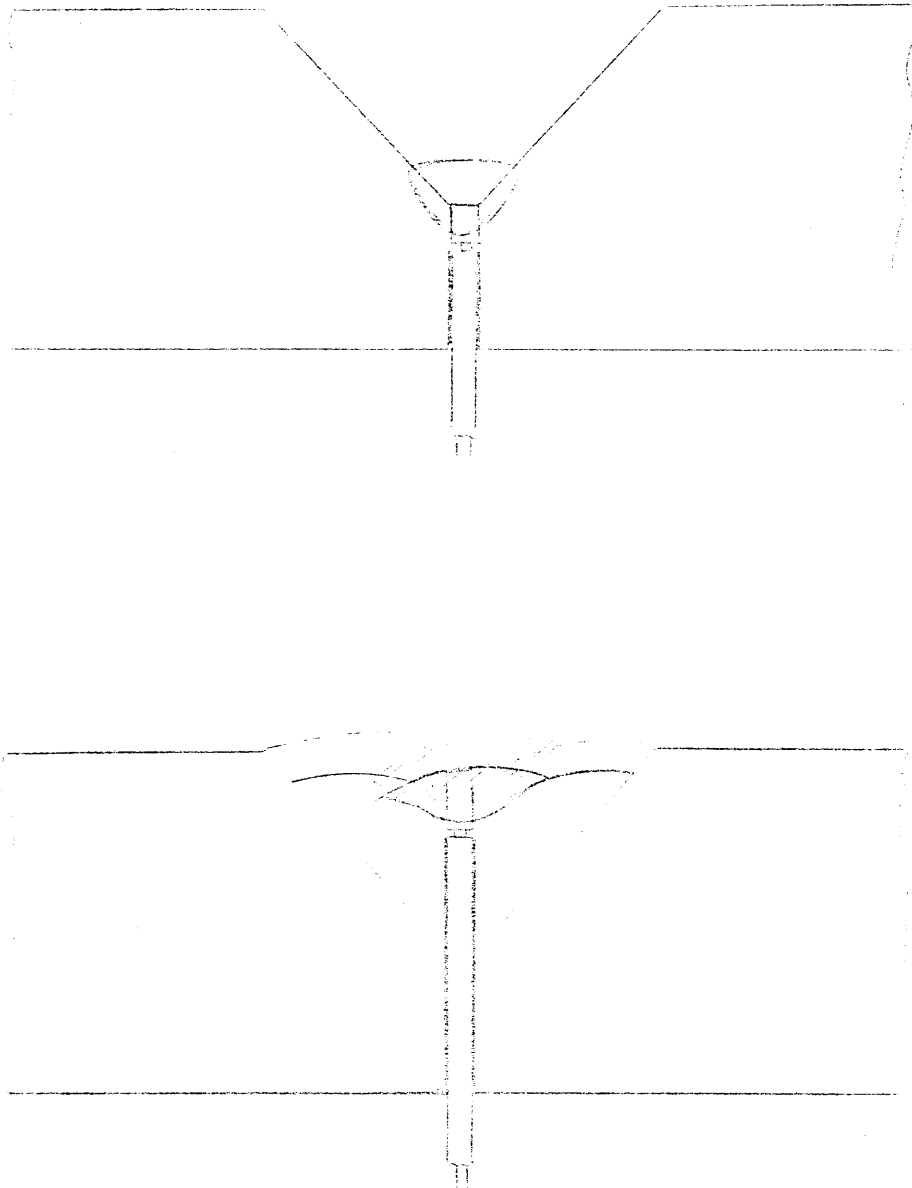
Thermocouple location in the weld bead, root and sub-surface.
